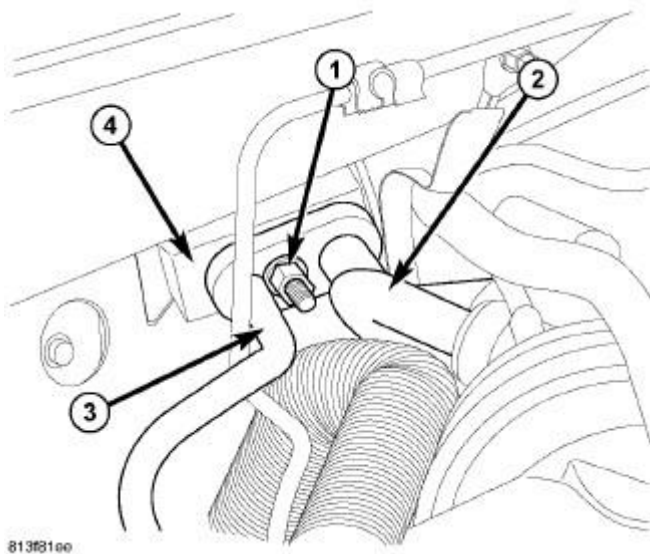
A/C EXPANSION VALVE LINES - REMOVAL & INSTALLATION
